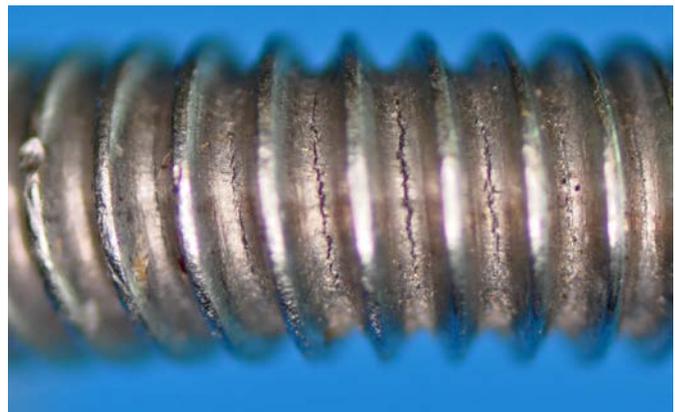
Cracks are clearly visible in this close-up in the area of the bend.
